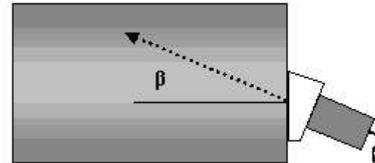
Cone Probe for Testing of railway Wheelset Axles for circumferential cracks from the center hole
